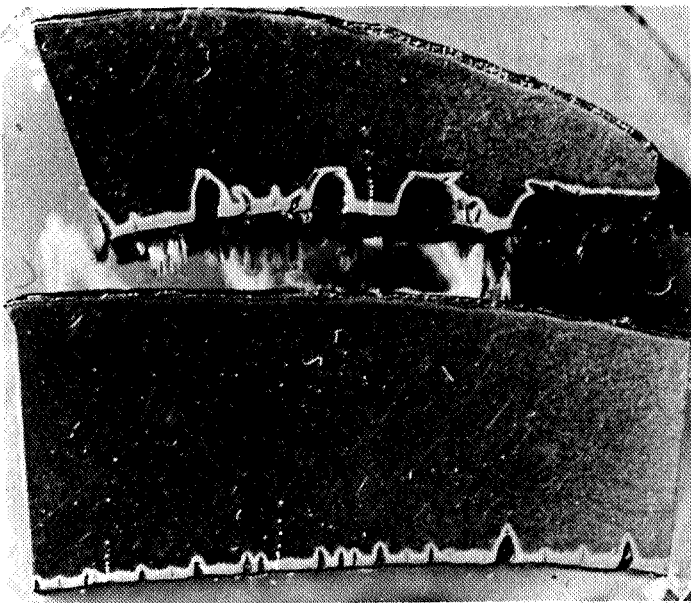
Cross section of rupture on a location halfway its length, south inlet tube.
